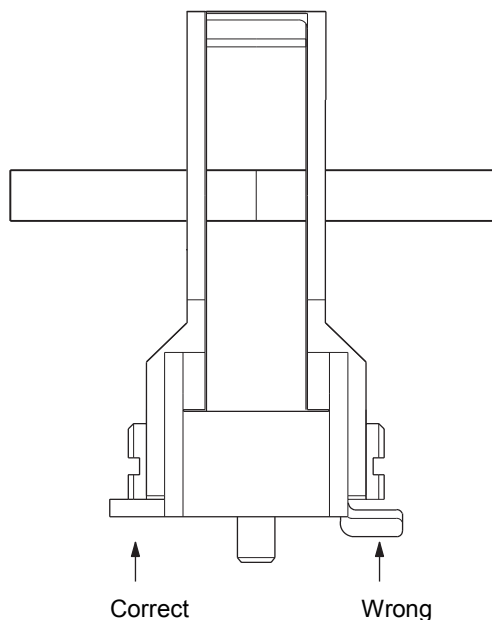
Checking the Weld Joint and Latch Position (Series 4 Fixture)
